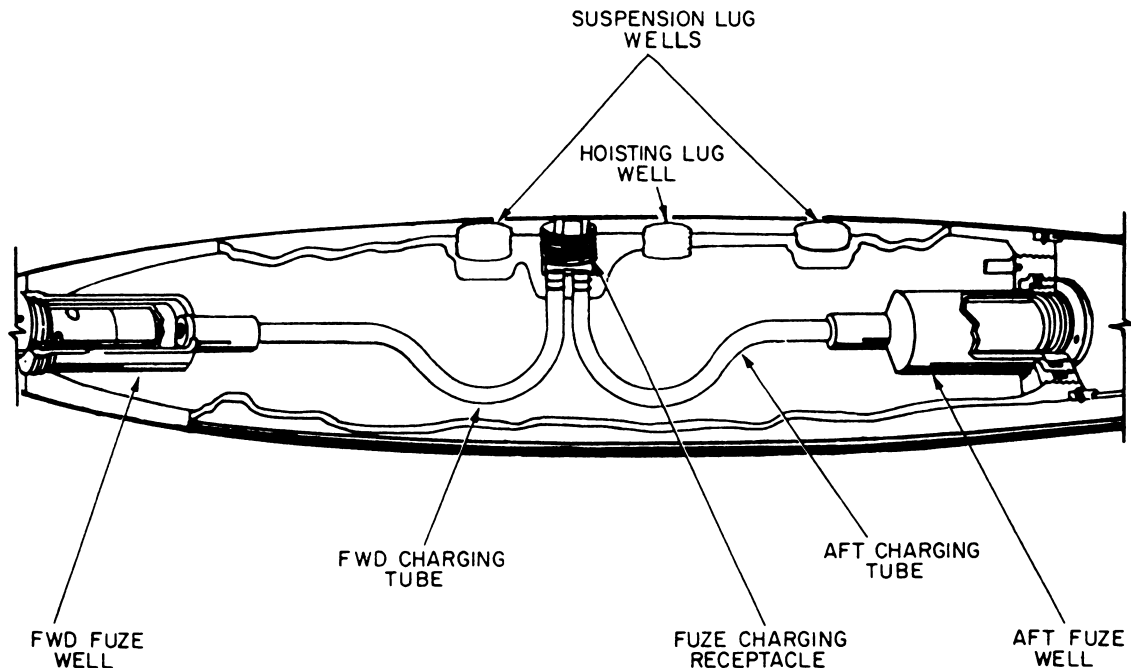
Sectional view of typical LDGP bomb Mk 80 (series).
